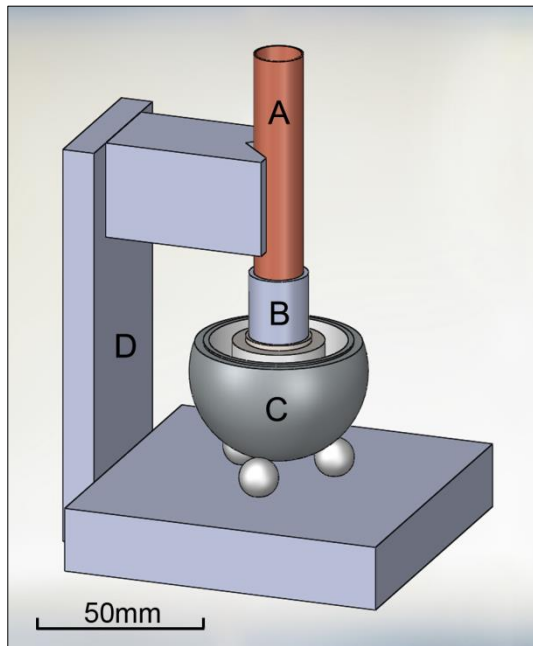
Showing alignment and replication fixture; A) Mounting tube, B) Replication extension sleeve, C) Large MoM femoral head, D) Three sphere alignment and replication fixture.
